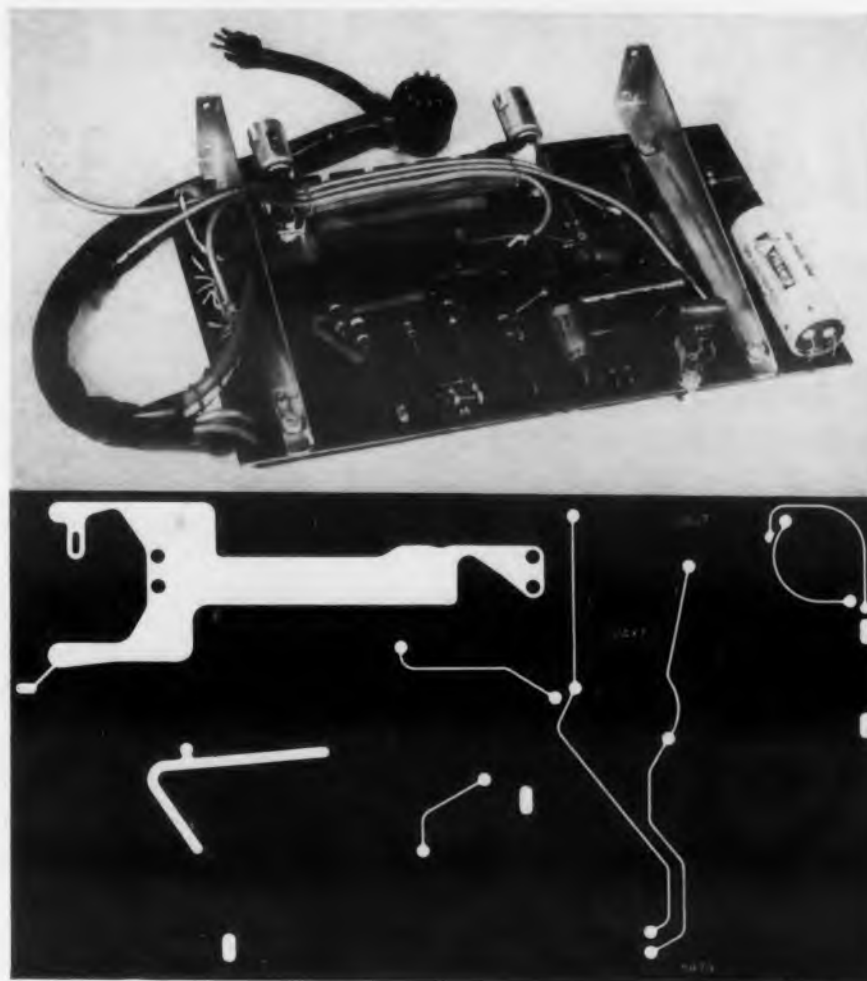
A bottom view of the same chassis and its master drawing. This is a tape recorder manufactured by Daystrom Electric Corp., Poughkeepsie, N. Y.
